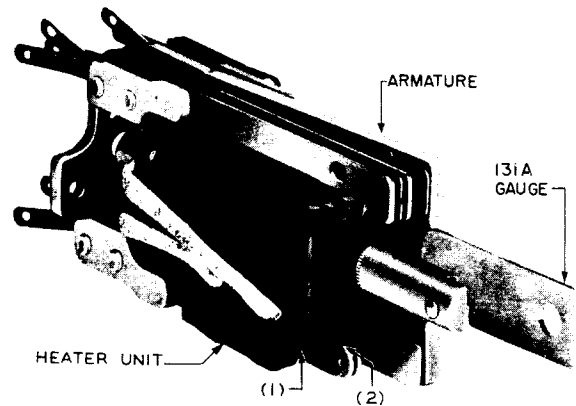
Fig. K — Position of Gauge When Checking Armature Travel — 271-Type Relay Shown
